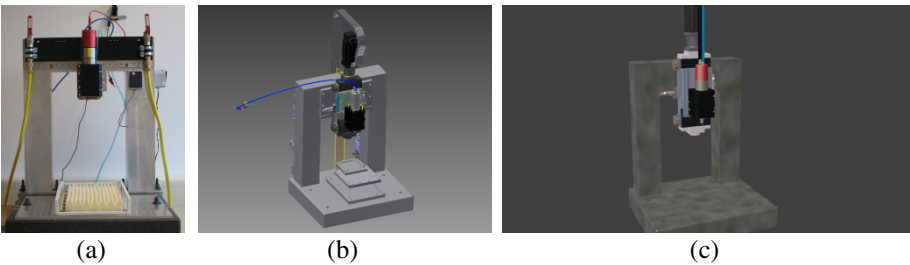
(a) Real micro milling machine; (b) micro milling machine designed in *Inventor* and (c) imported into *Blender
